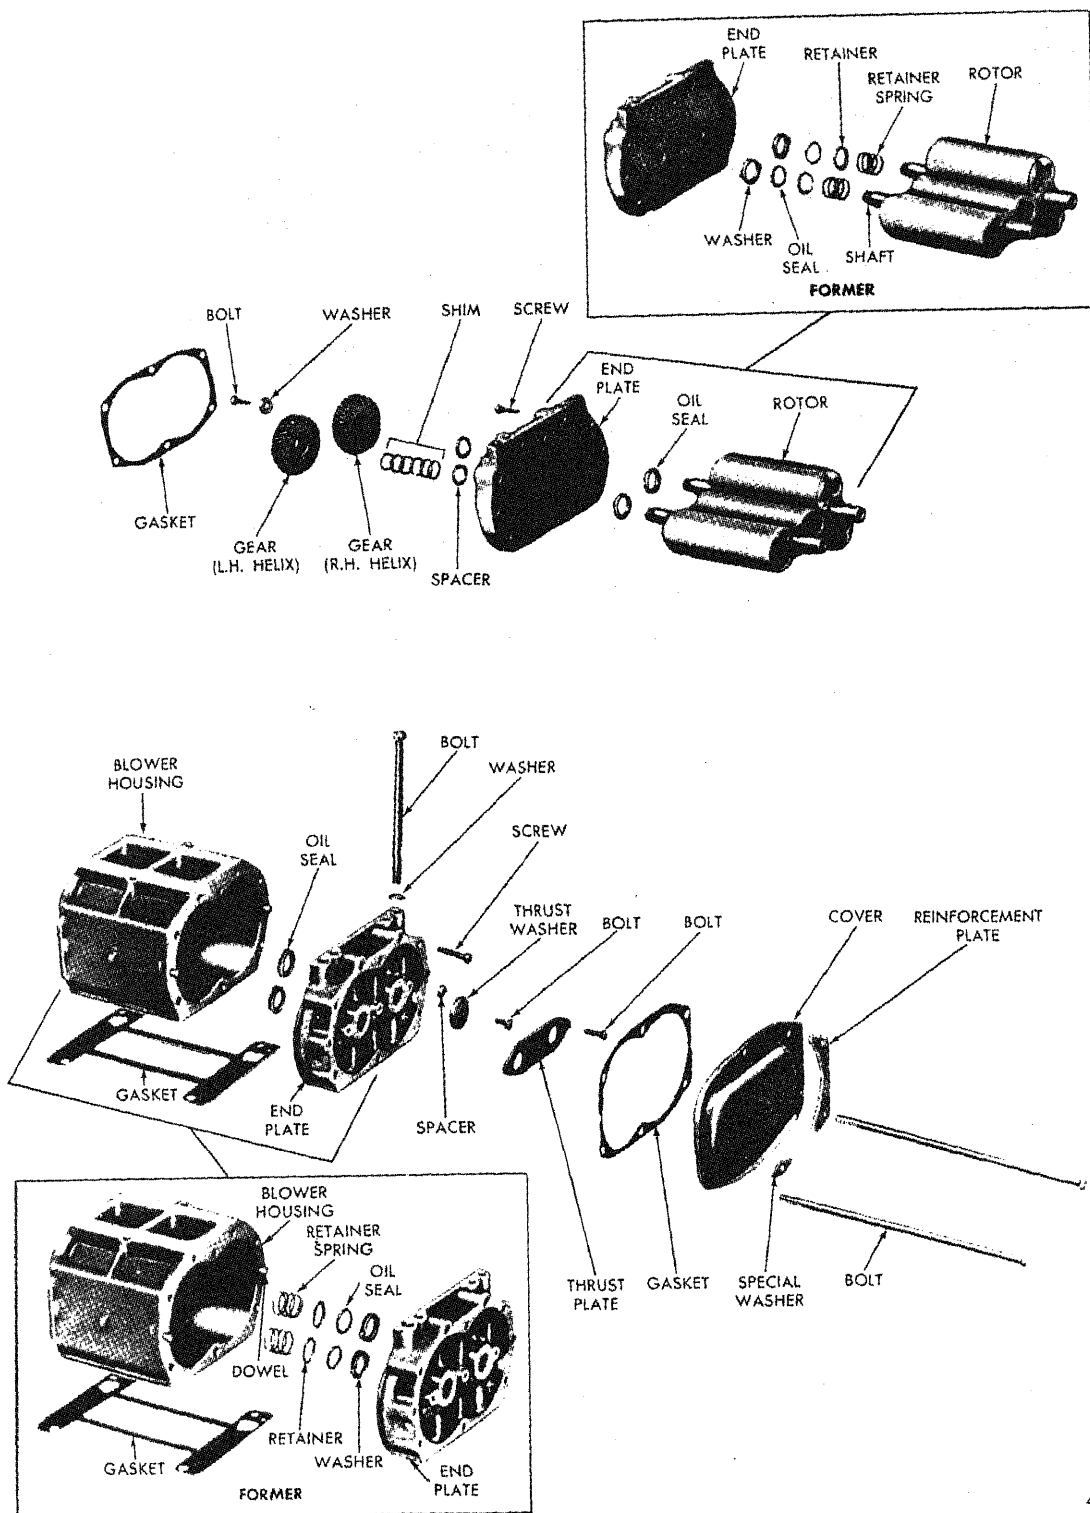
Typical Blower Details and Relative Location of Parts (3-53 Engine Blower)
